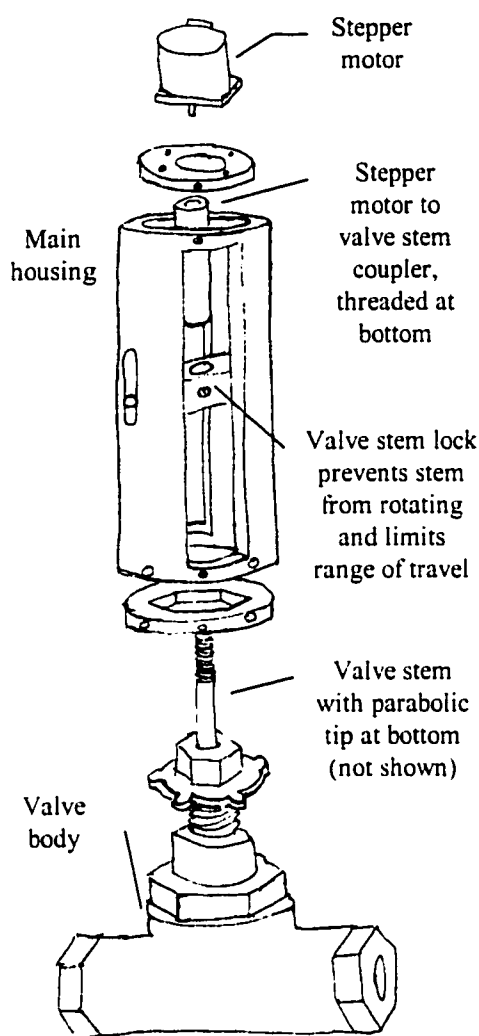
Exploded view of stepper motor mounting and coupling to a parabolic all metal valve.
